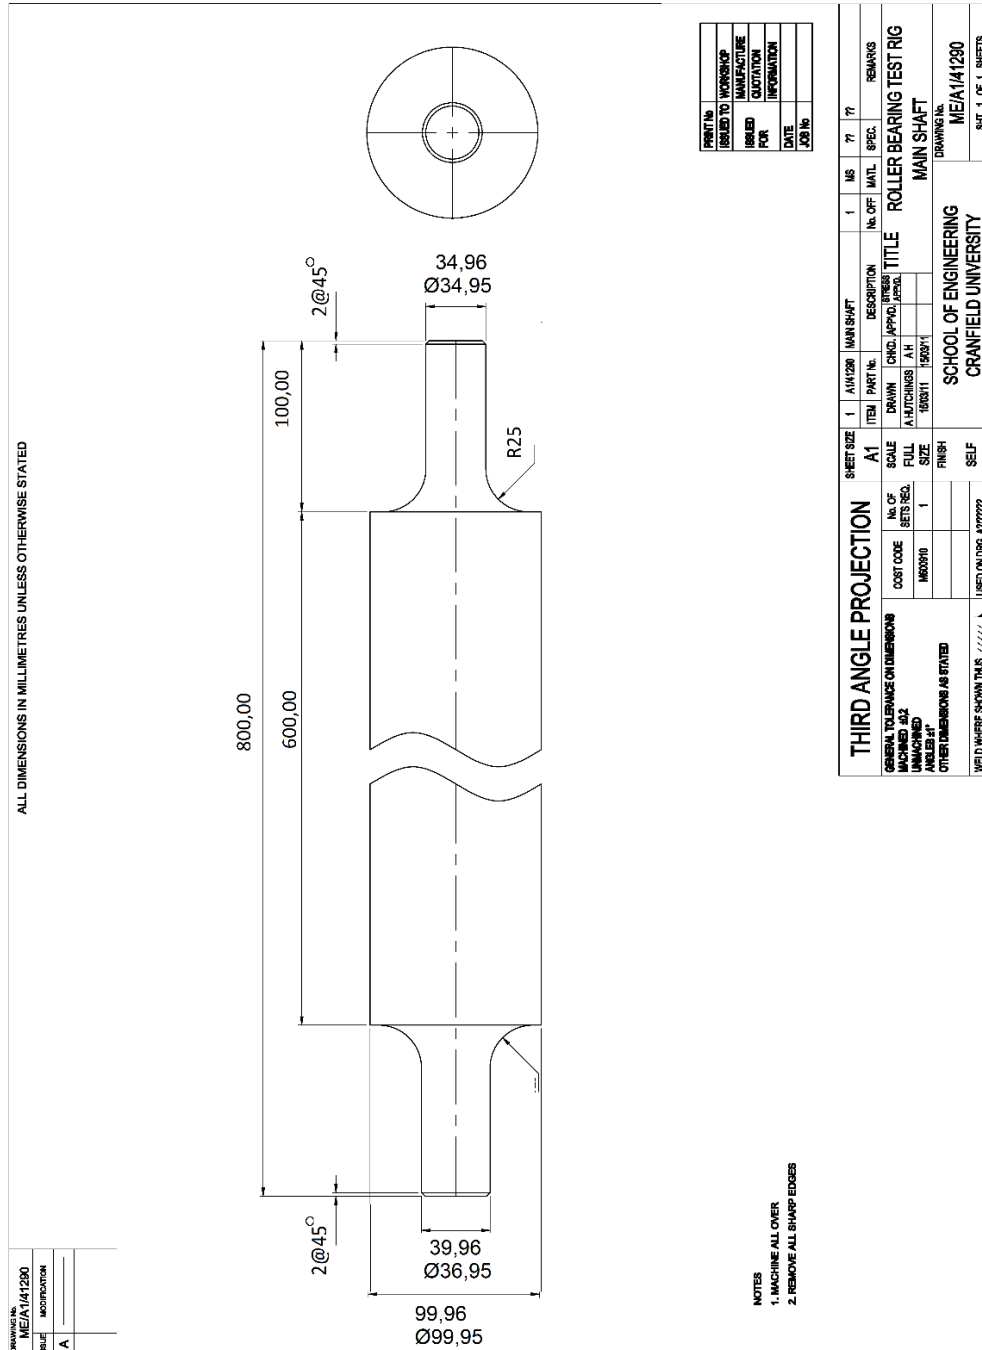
Drawing of shaft (bearing at “top”) [143]
